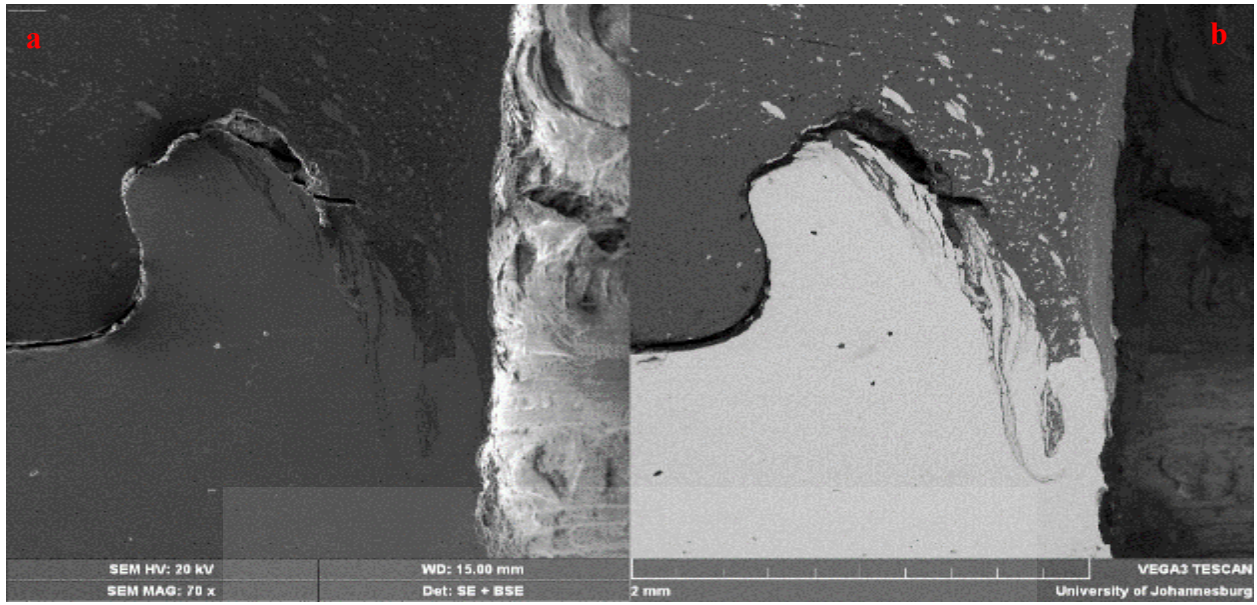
Showing a secondary electron (a) and a backscattered electron (b) images of the spot weld produced at 800 rpm and 0.5 mm plunge depth using a flat pin and a flat shoulder tool
